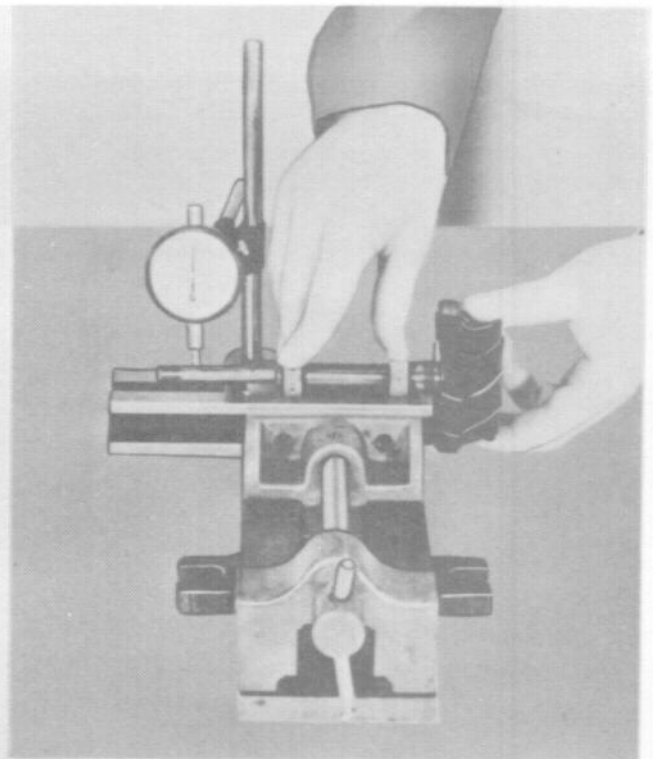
Turbocharger assembly, disassembly and reassembly (sheet 2 of 5).
